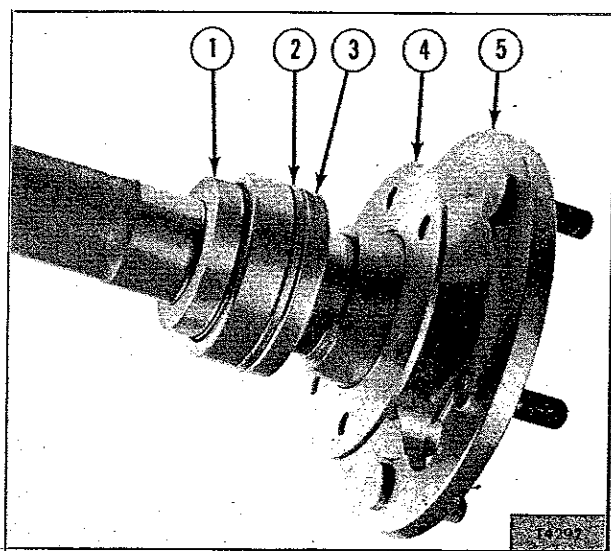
AXLE SHAFT BEARING INSTALLED
